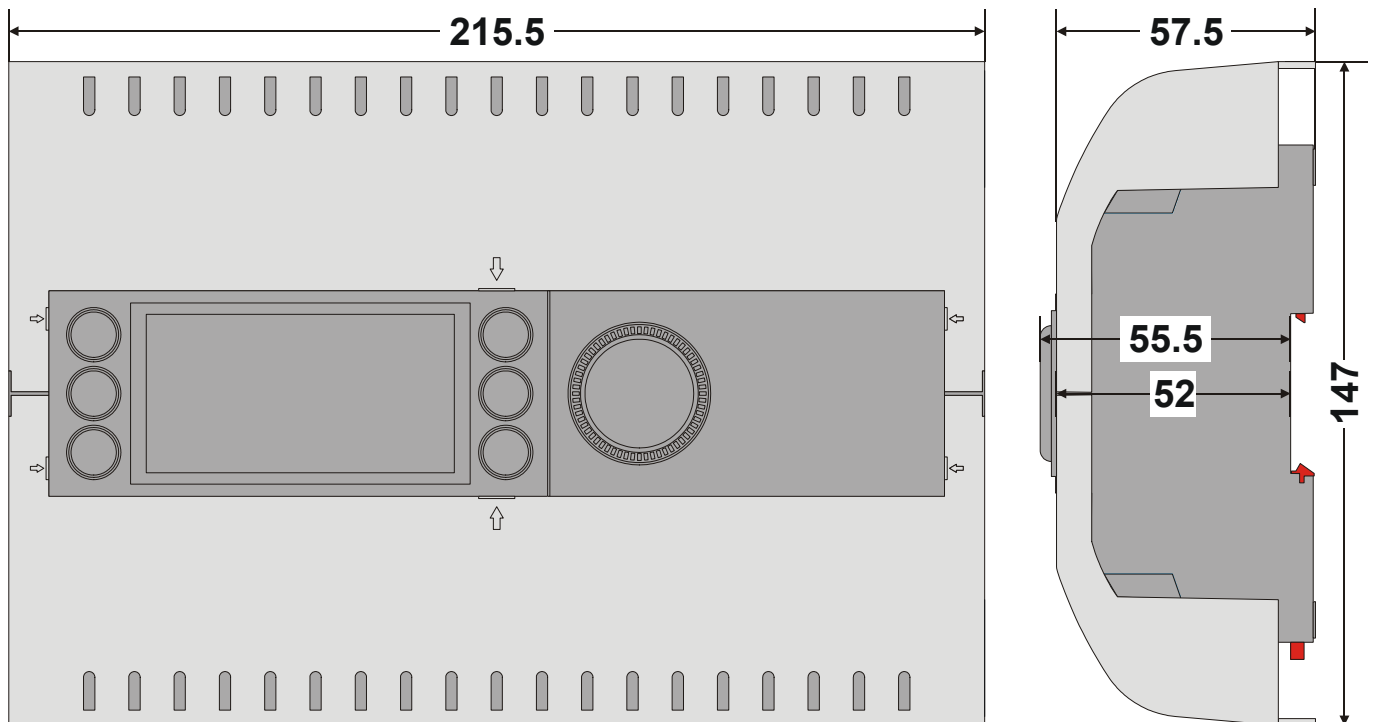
MVC Controller (MVC-80M-CPSW1A, shown with terminal covers), dimensions (in mm)
